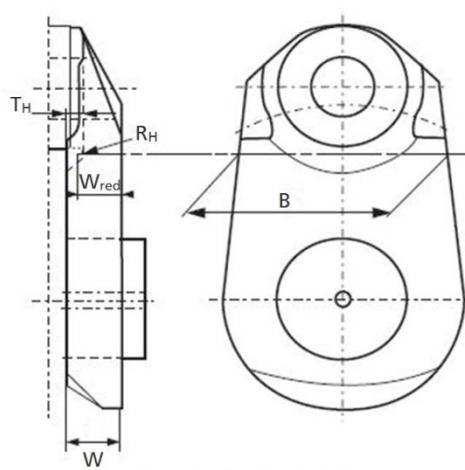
Crank dimensions for overlapped crankshaft
